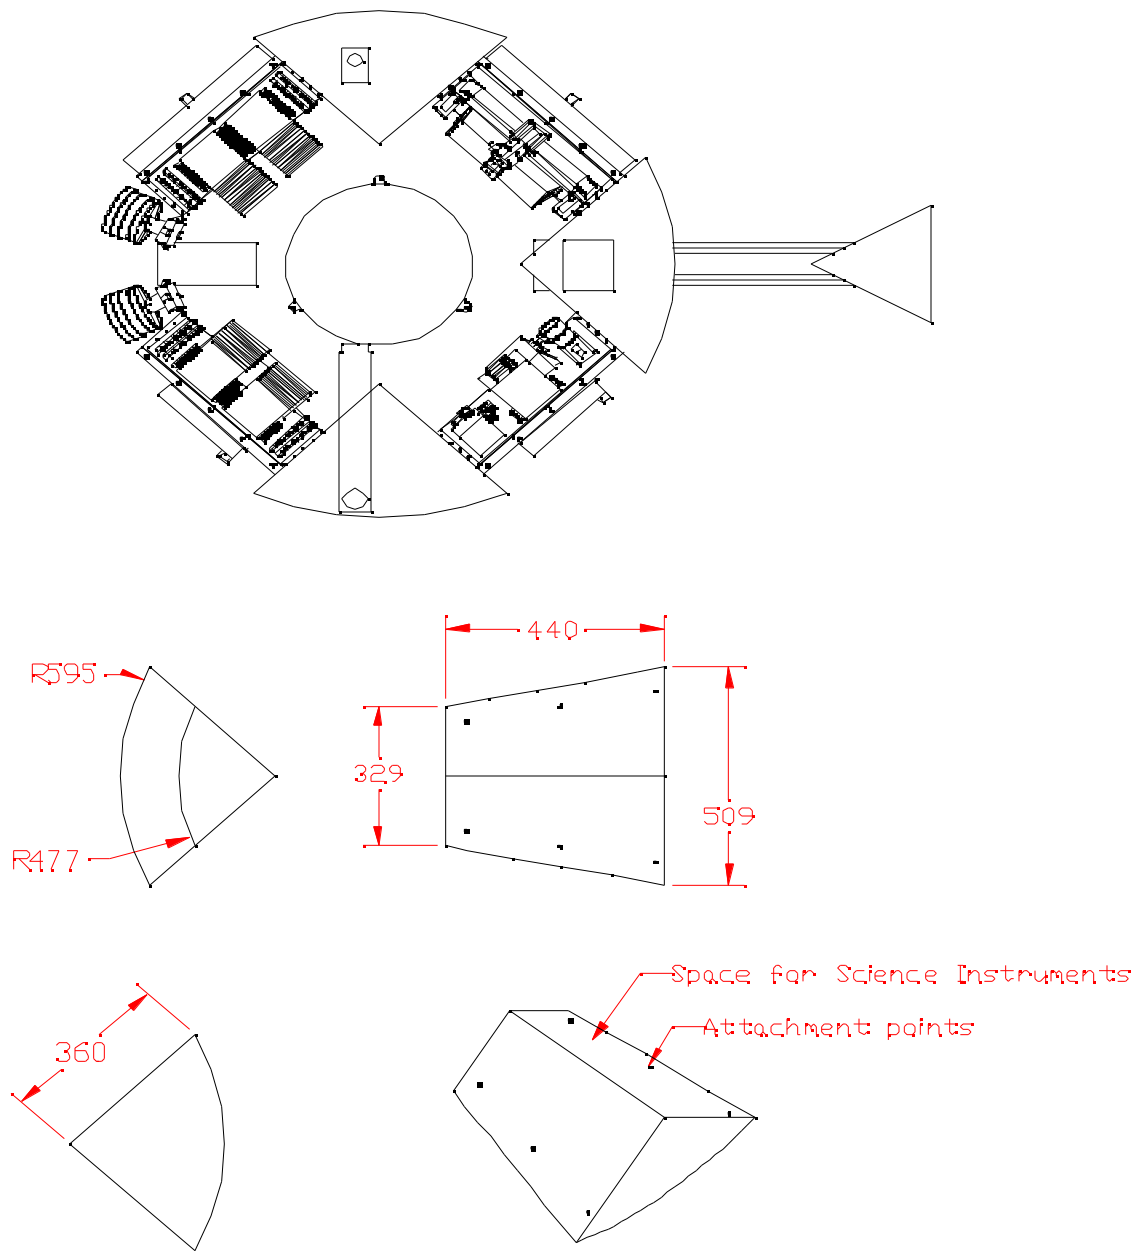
Bus Tapered Wedge Quadrants (dimensions in mm)
